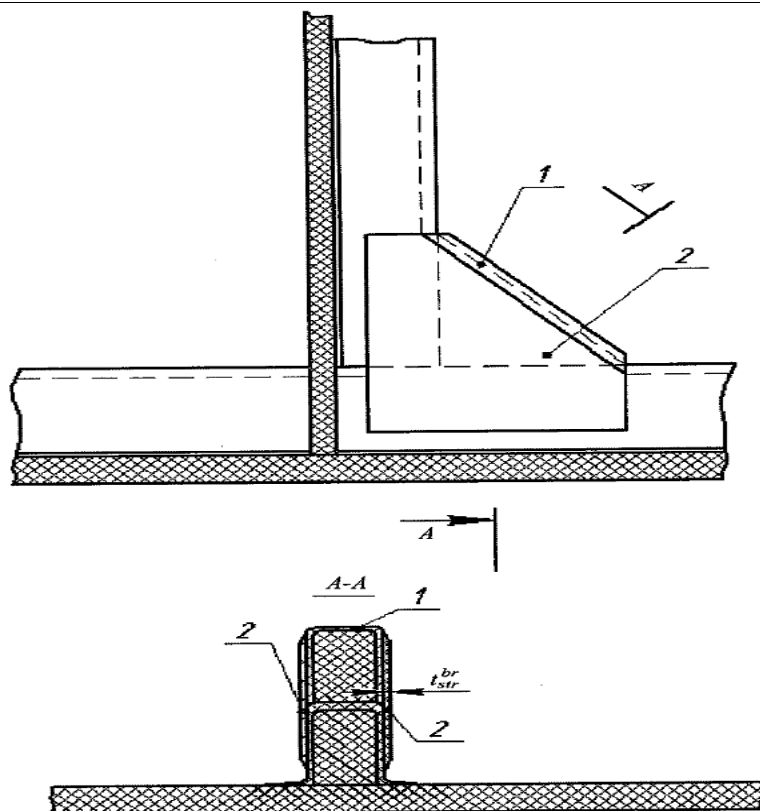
Joint of the bracket and framing members by means of straps:
